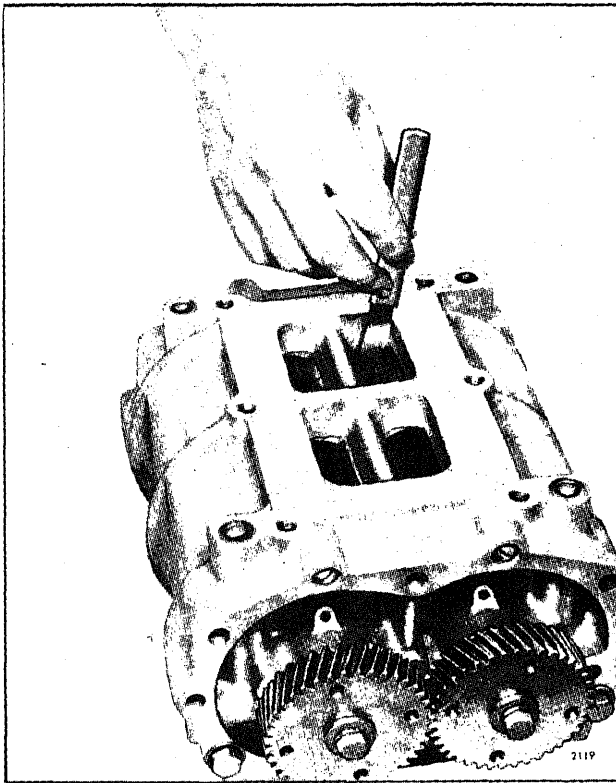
Measuring Rotor Lobe to End Plate Clearance
